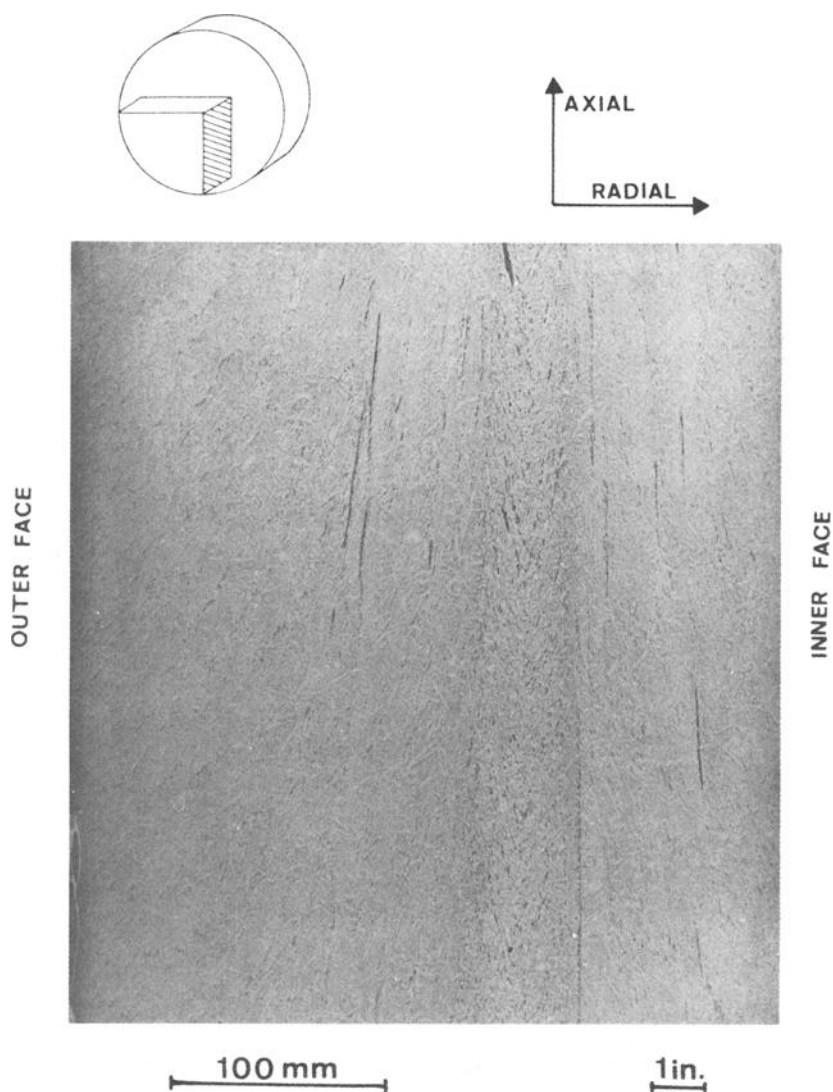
Shell made from hollow ingot. Macroscopic aspect of a cross section of nozzle cutout.
